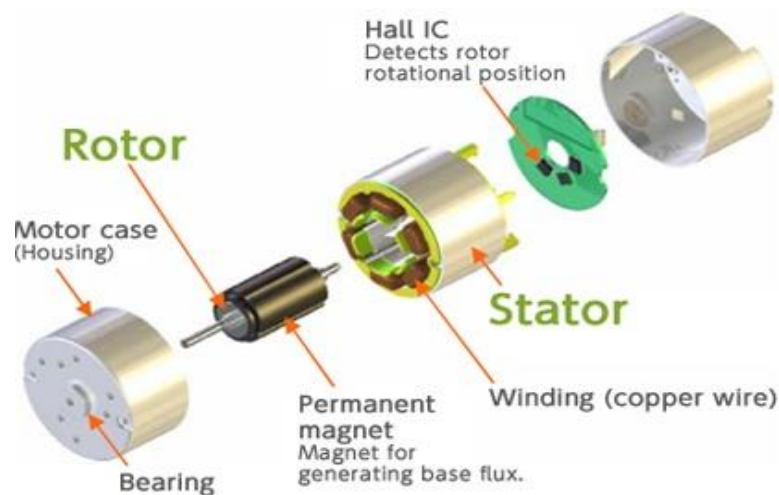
Exploded View of BLDC Disc Motor (Nidec, n.d.)
